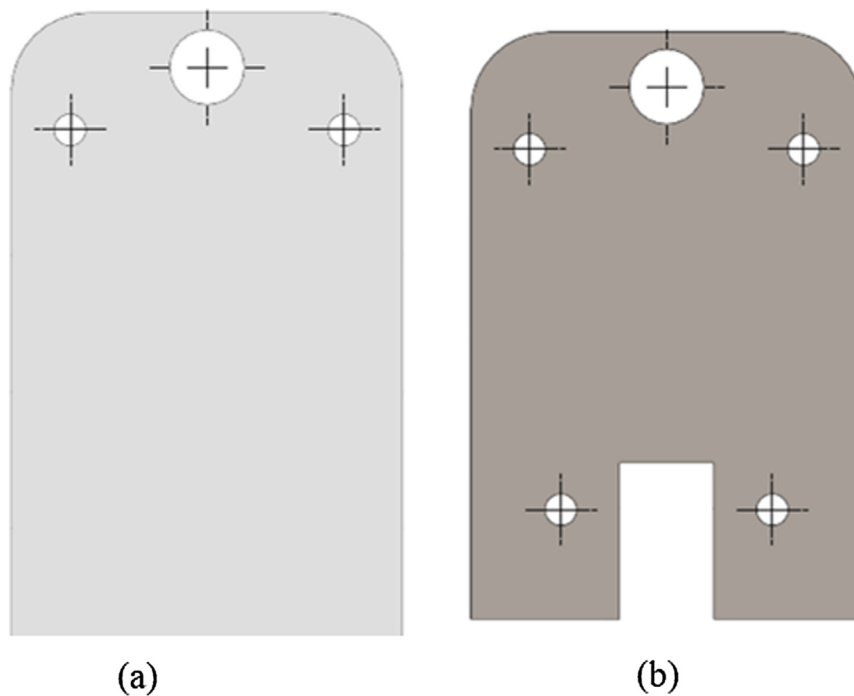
Plates for supporting the torsion motors, (a) fixed plate, (b) mobile plate.
